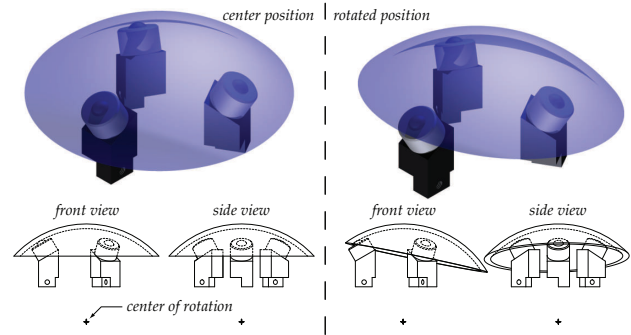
A spherical cap supported by three ball bearings has only three rotational DOF
